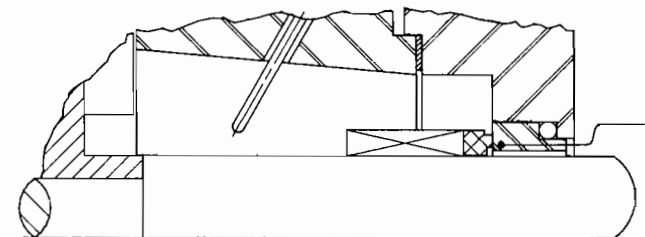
Enlarged Tapered Seal Chamber, Pump A.
